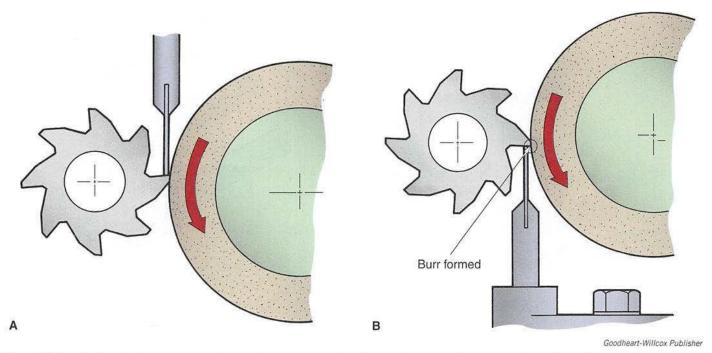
Tooth grinding setup. A—The wheel grinds away from the cutting edge of the tooth. With this technique, there is less chance of drawing the temper out of the tooth, and no burr is formed. B—If the wheel grinds into the cutting edge of the tooth, there is a greater chance that a burr will form or the temper will be drawn.
